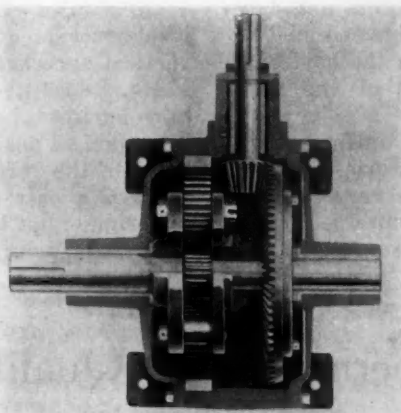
COMBINED BEVEL-GEAR AND PLANETARY UNIT
